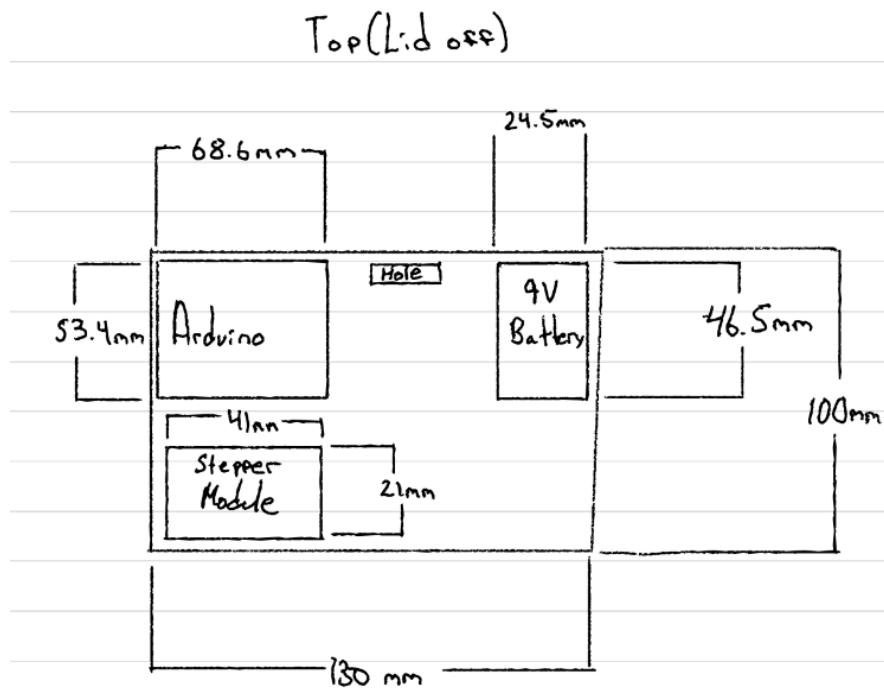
Top view of the housing with lid off. Arduino, Stepper Module, and 9V battery can be seen laying in respective positions. The rectangle marked Hole is a hole for the wiring from the stepper motor to be connected to the module.
